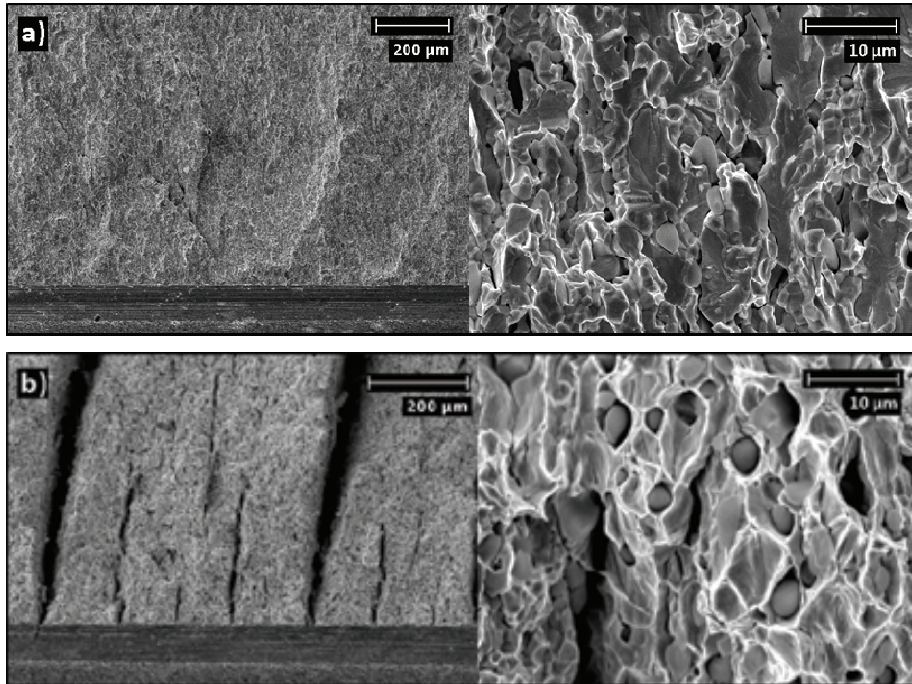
Fracture surfaces of FM W-2wt.%Y₂O₃ specimens tested at a) 200 °C and b) 300 °C. Right part images show fracture morphology at a higher magnification.
